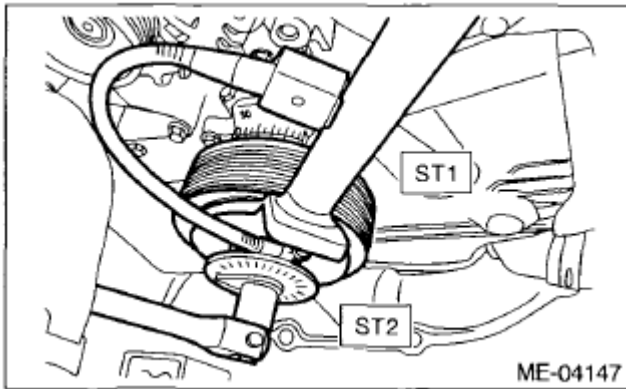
Attaching Magnet Used For Securing ST2 To ST1
